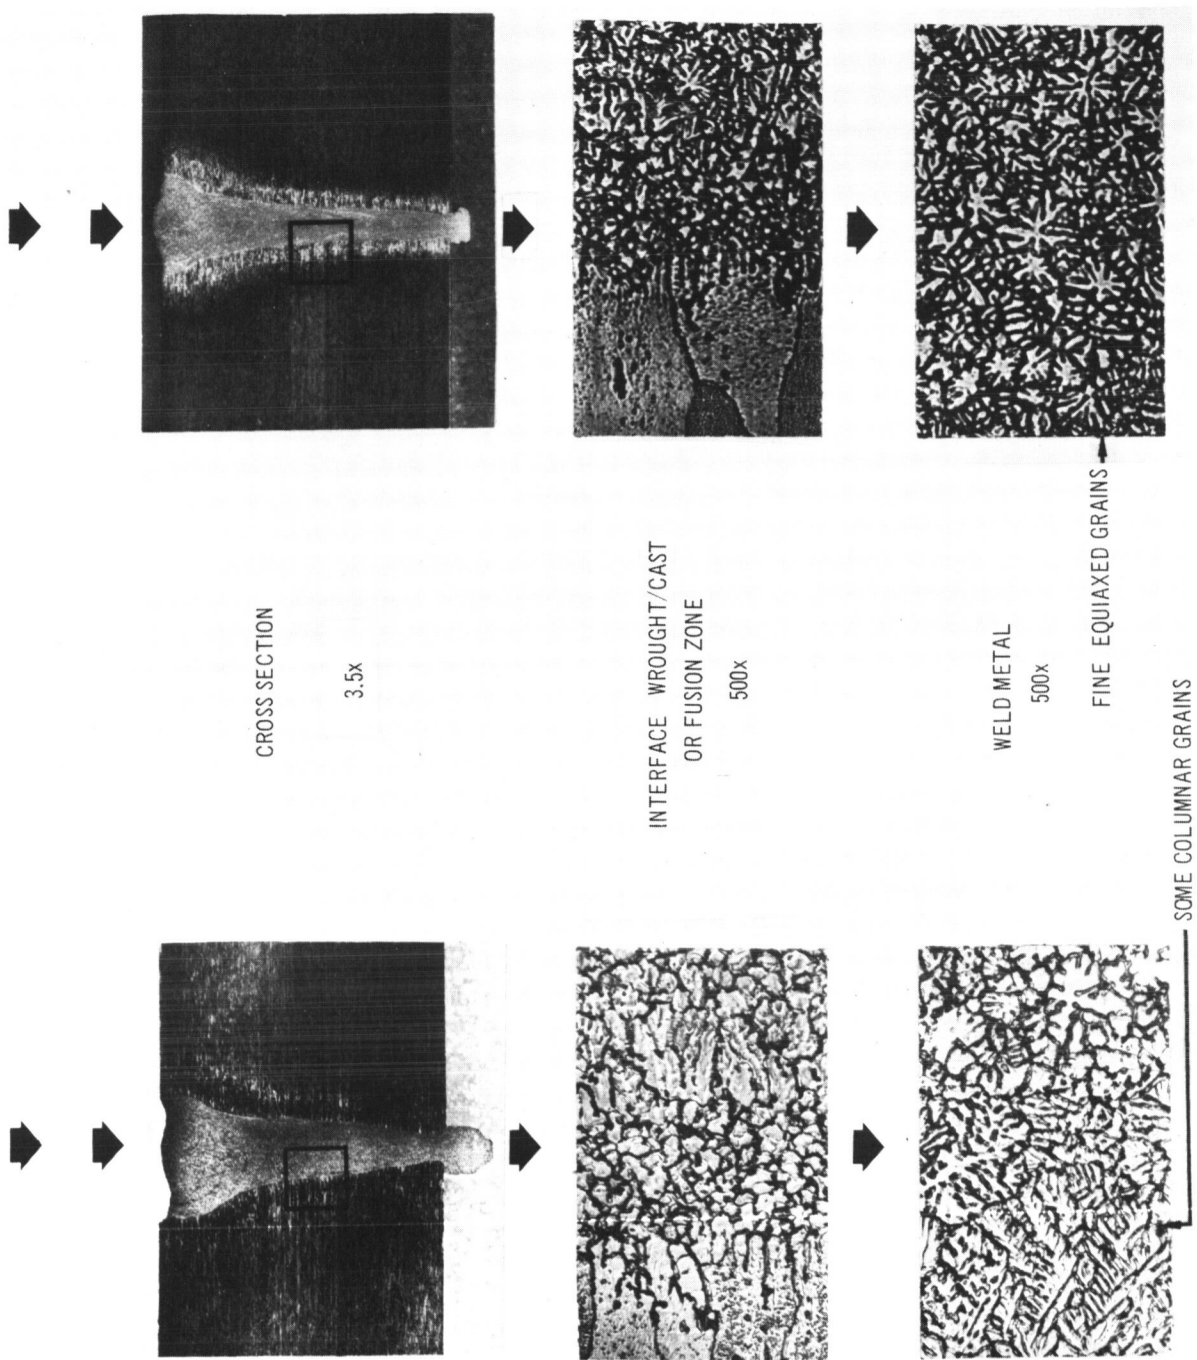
EFFECT OF WELDING SPEED AND POWER INPUT ON MACRO- AND MICRO- STRUCTURE OF EB WELDED 2219-T81 1/2-IN. THICK PLATE.
